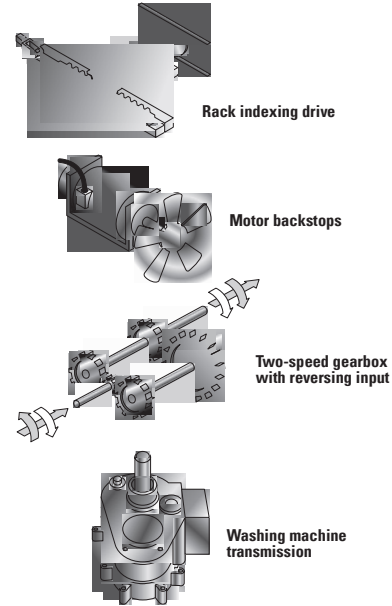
(2). Drawn cup clutches and clutch and bearing assembly applications
